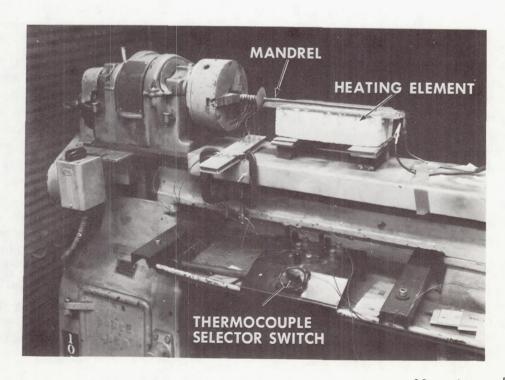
Plasma Spray Mandrel Installed in Lathe and Ready for Spraying M-52131
